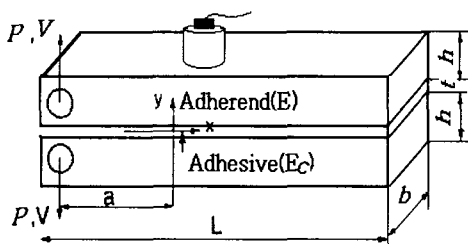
Specimen geometry of the DCB specimen used in the FCG testing
